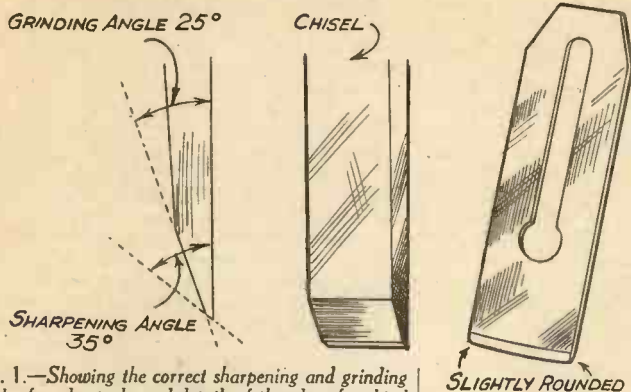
Showing the correct sharpening and grinding angles for edge tools, and details of the edge of a chisel and plane iron.
